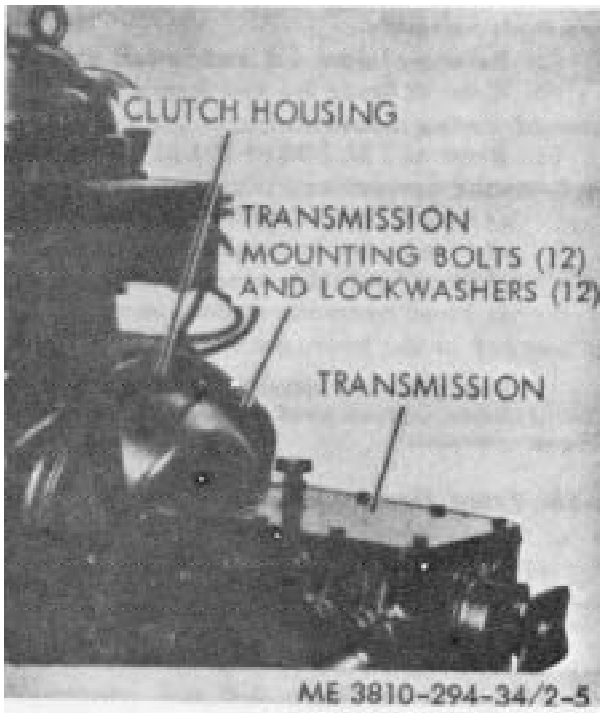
Transmission/clutch assembly, removal and replacement.
